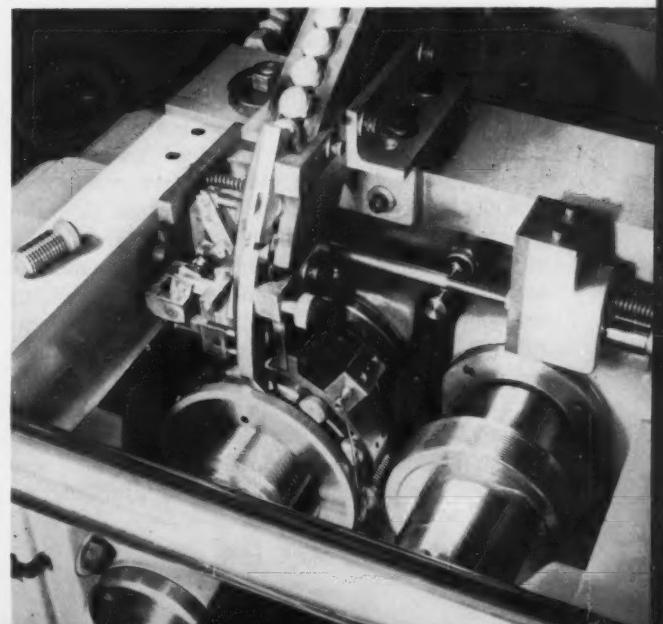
Close-up of thread rolls and automatic feed used on "Lanhylrol" thread-rolling machine
